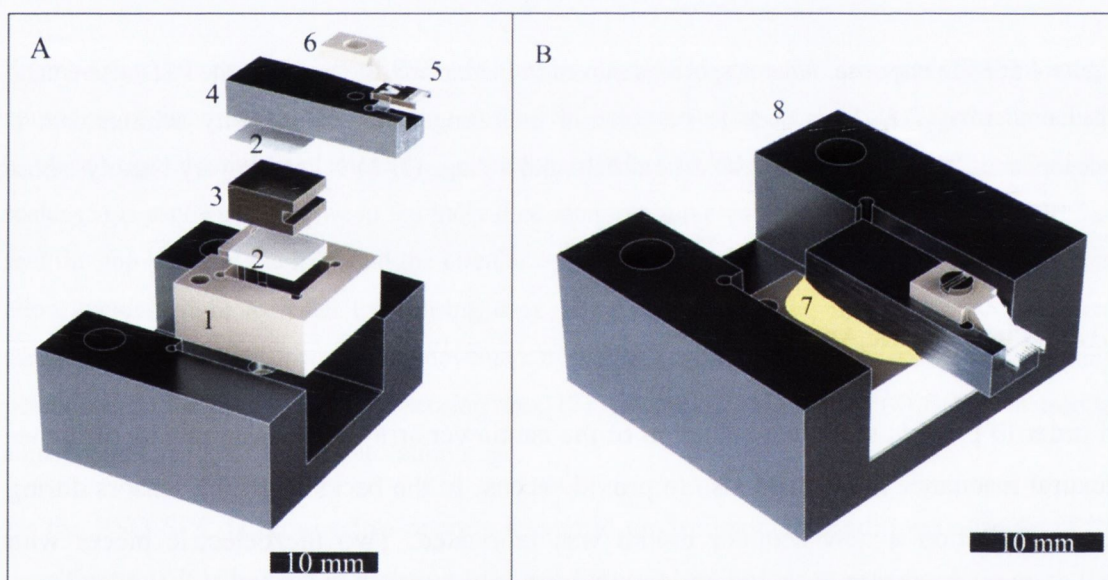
(A) Expanded view of piezoelectric actuator. A piezoelectric three-stack is sandwiched between two pieces of macor. A stainless steel platform with a PEEK clamp holds the cantilever in position. (1) PEEK housing for stack. (2) Macor. (3) Piezoelectric stack. (4) Stainless steel platform for cantilever array. (5) Cantilever array. (6) PEEK clamp. (B) Assembled piezoelectric actuator. The piezoelectric/macor stack is housed in a PEEK holder and insulated using Torrseal<sup>®</sup>. The assembled actuator is screwed to a piece of machined aluminium. An IC socket is glued to this piece as a stress reliever for the wires attached to the piezo stack (not shown in image). (7) Torrseal<sup>®</sup>. (8) Machined aluminium piece.
